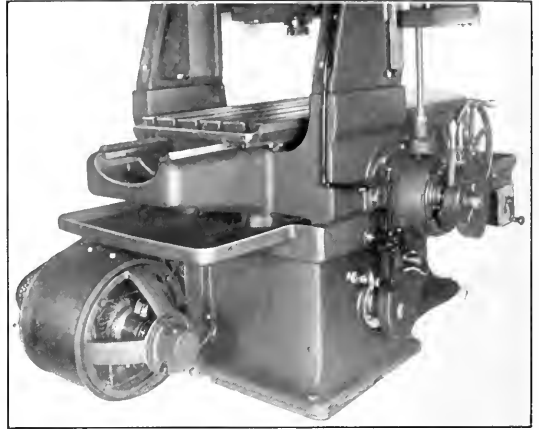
Motor Drive through Silent Chain applied to Garvin Milling Machine
